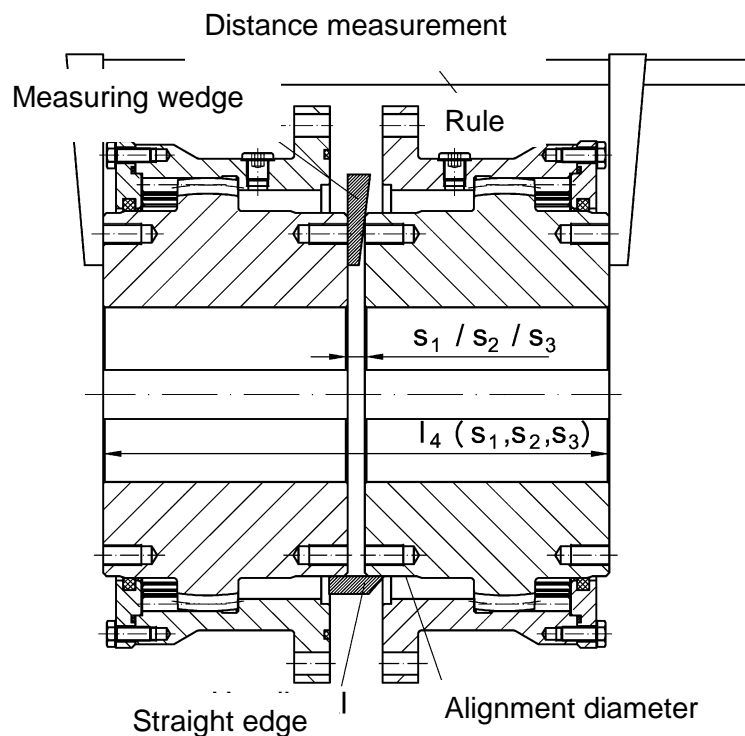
Clearance measurement using straight edge resp. control wedge and alignment using straight edge
